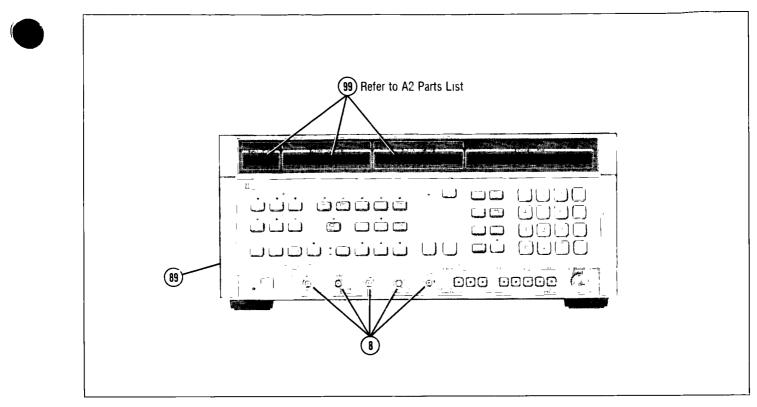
Miscellaneous Mechanical & Chassis Parts (1 of 6)
